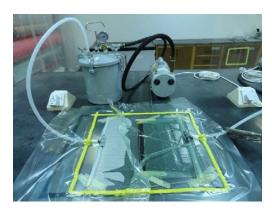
Vacuum assisted resin transfer molding (VARTM) process
